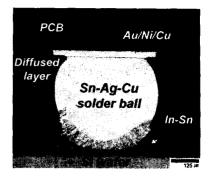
Cross-sectional optical microscopy of Sn-Ag-Cu/In-Sn solder joint.
